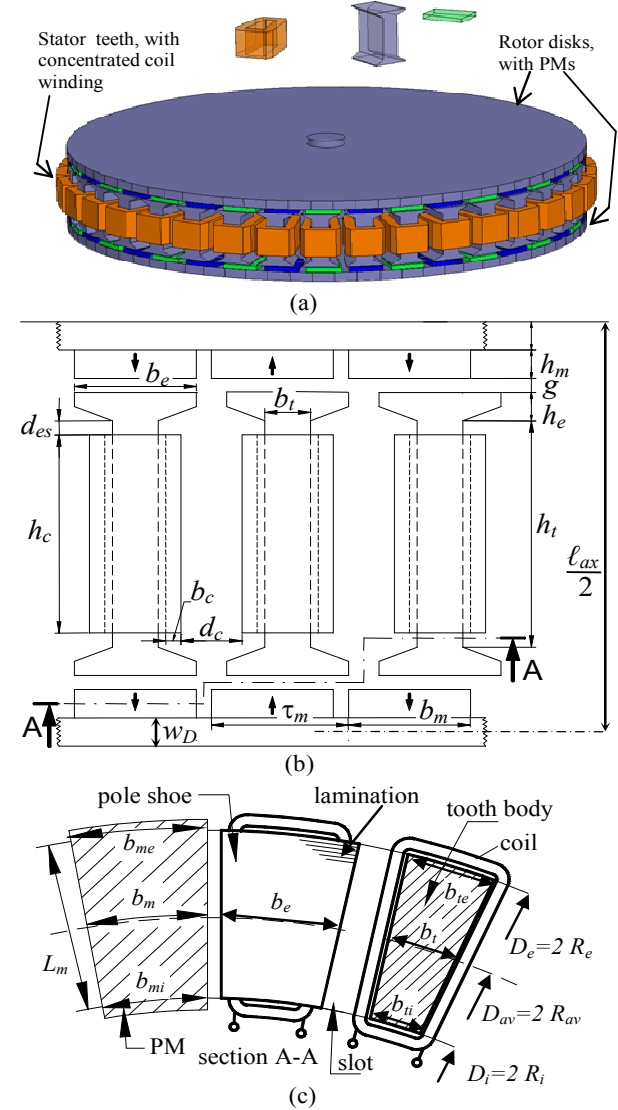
Single module of an AFPM machine (a) equipped with tooth concentrated coil (TCC) windings. Machine transversal (b) and axial (c) sections and main sizes.
